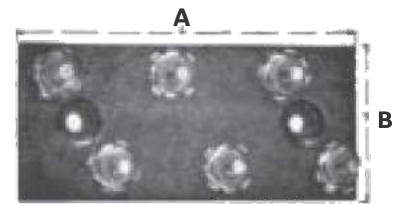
6-point terminal board, Type EB-4, Cat. 2860351G3
